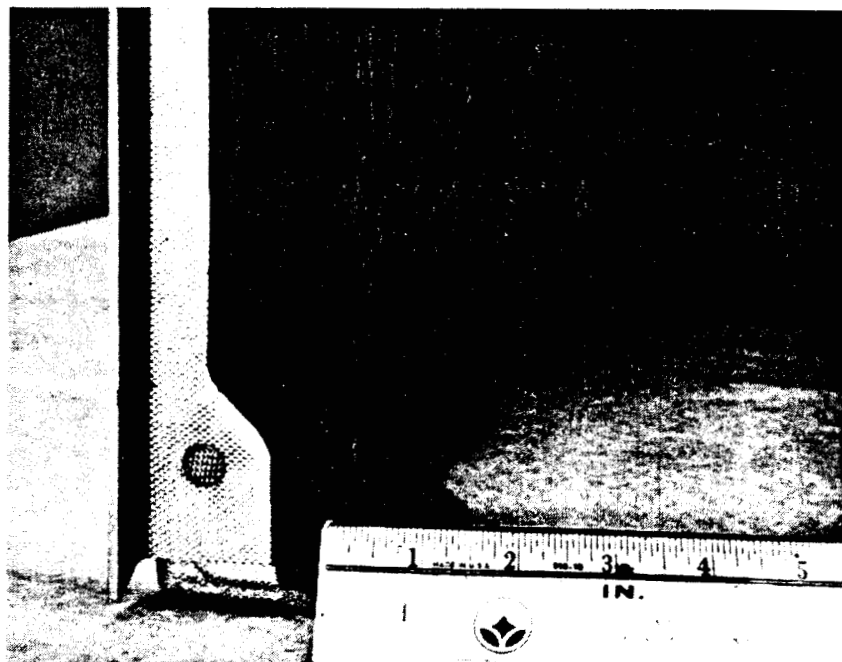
LEADING EDGE SECTION SHOWING RPP RIVET
